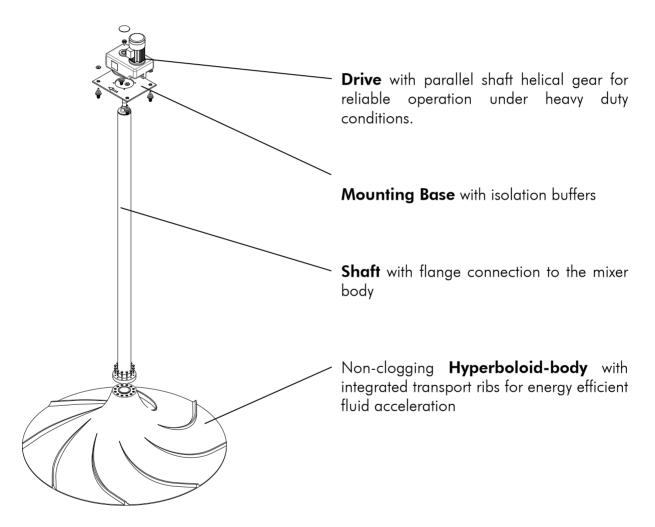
Exploded view on a Hyperboloid Mixer with top mounted drive
